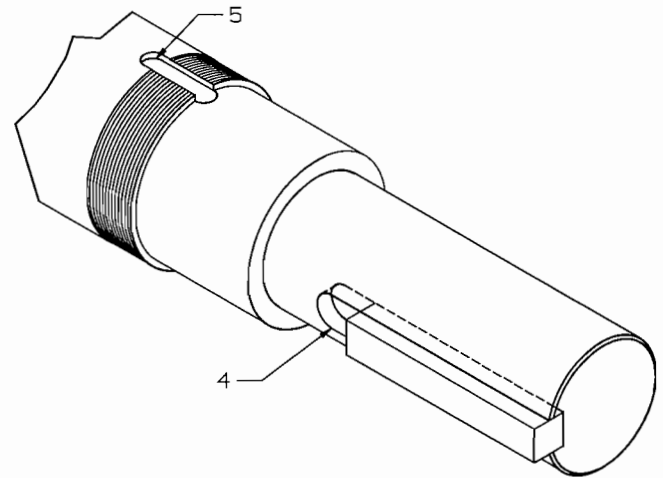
Typical End Suction, Heavy Duty Pump—Coupling End.
